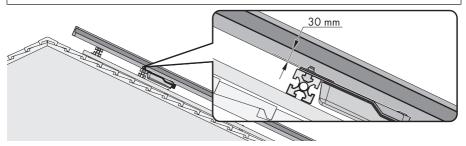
Minimum clearance of the inverter to the bottom side of the PV module
